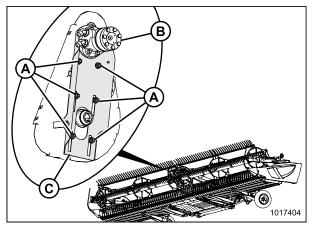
Reel Drive (Parts Removed for Clarity)
